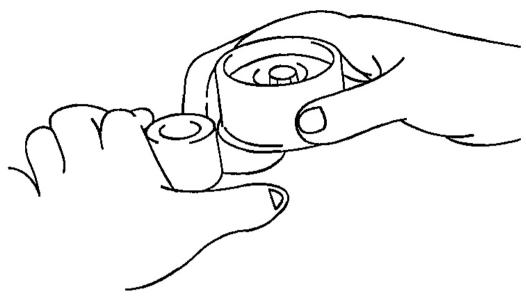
Testing Timing Belt Tensioner Courtesy of KIA MOTORS AMERICA, INC.
